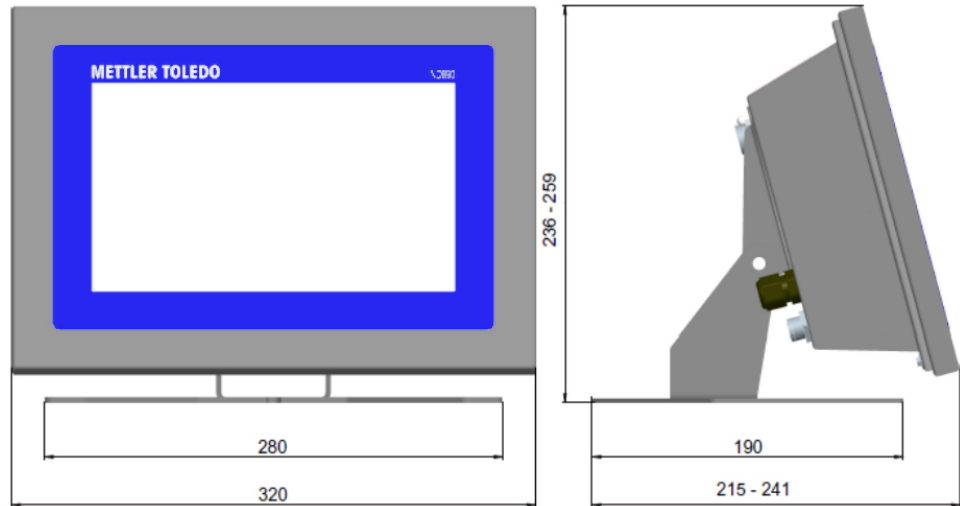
Dimensions of IND930, Desk/Panel Version
